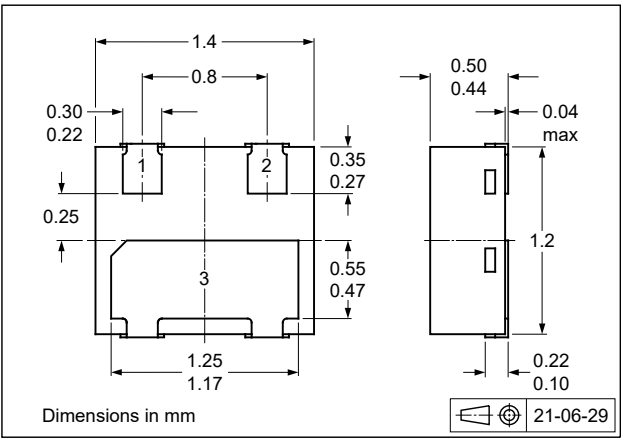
Package outline DFN1412D-3 (SOT8009)
